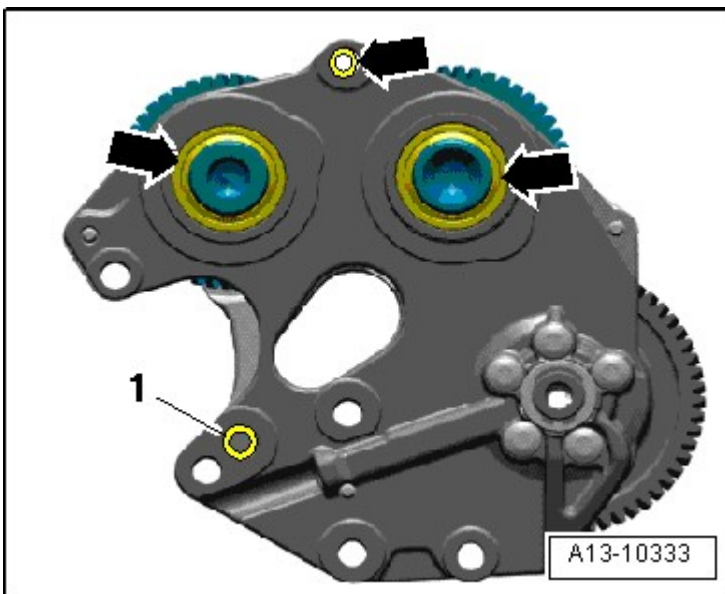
Applying Sealant Beads To Clean Sealing Surfaces Of Spur Gear Unit
